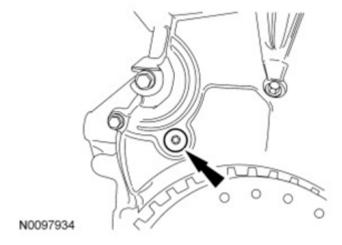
Locating Lower Front Cover Timing Hole Plug Courtesy of FORD MOTOR CO.
